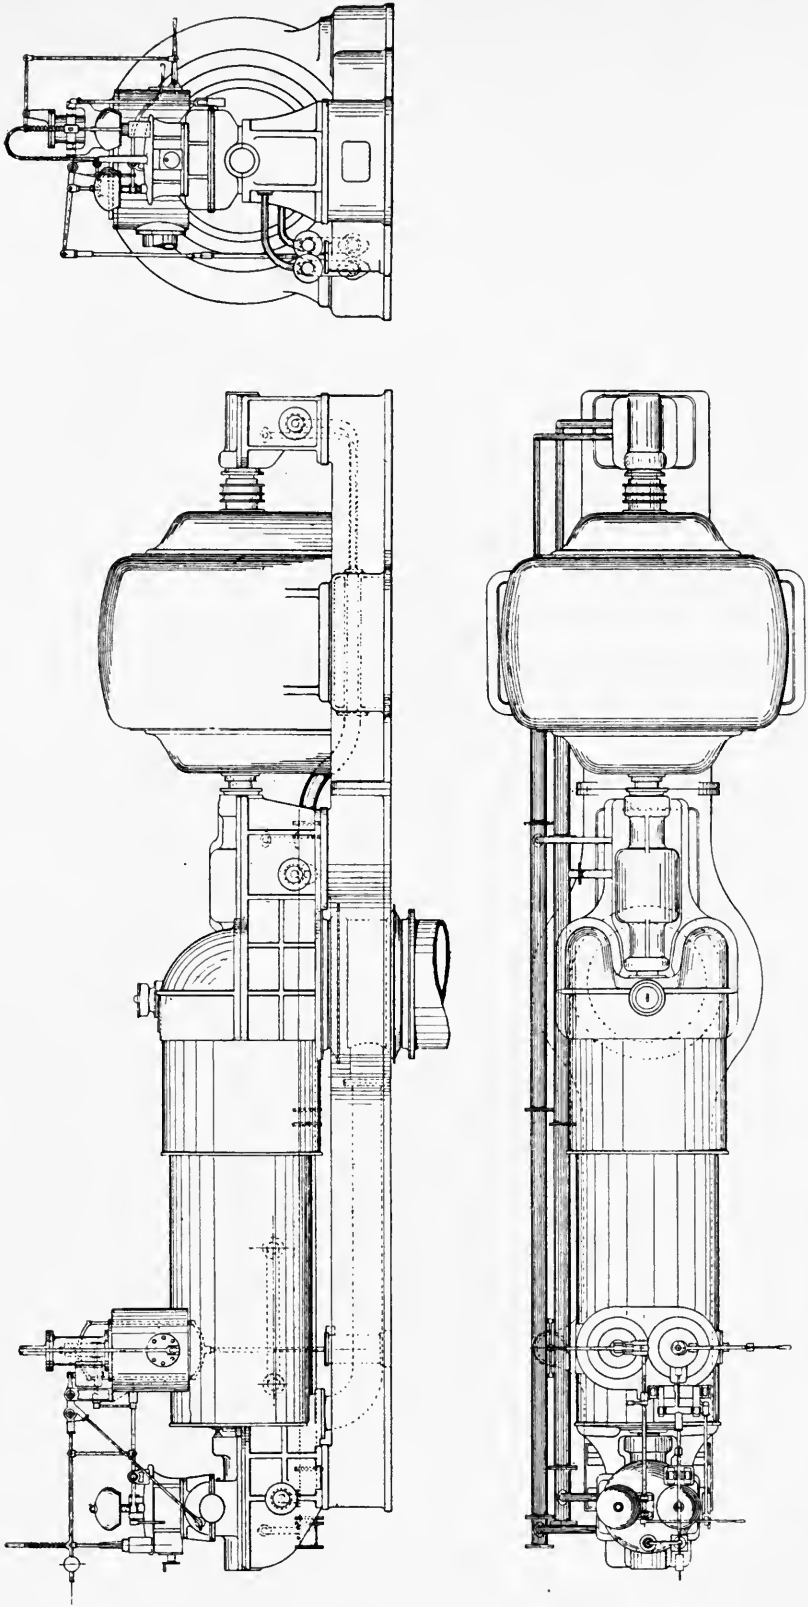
Plan, Elevation, and End View of Brush Steam Turbine.
